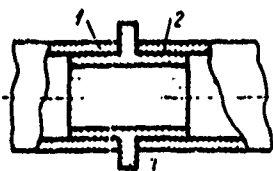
The welding of two stationary tubes with the third rotational body: 1, 2 welding tubes; 3 grooved intermediate part.
